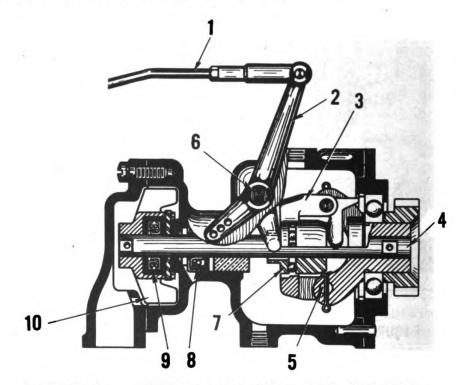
GOVERNOR AND WATER PUMP ASSEMBLY
